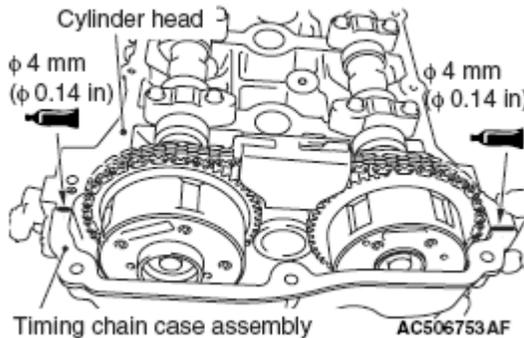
Applying Sealant To Joint Between Cylinder Head And Timing Chain Case Assembly
